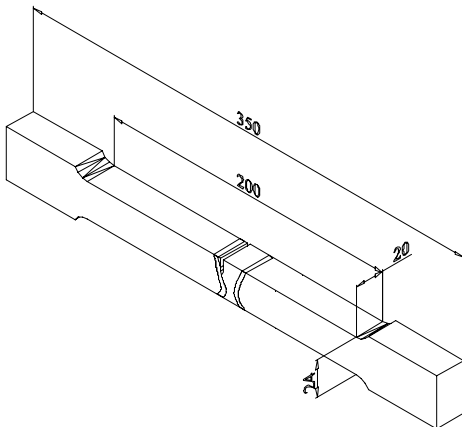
Tensile test specimen precracked in heat-affected-zone
